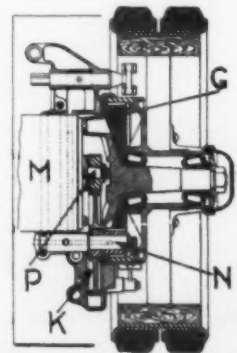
Spur-Gear Drive. M, motor; P, motor pinion; G, spur gear; N, spur pinion; K, internal gear.
